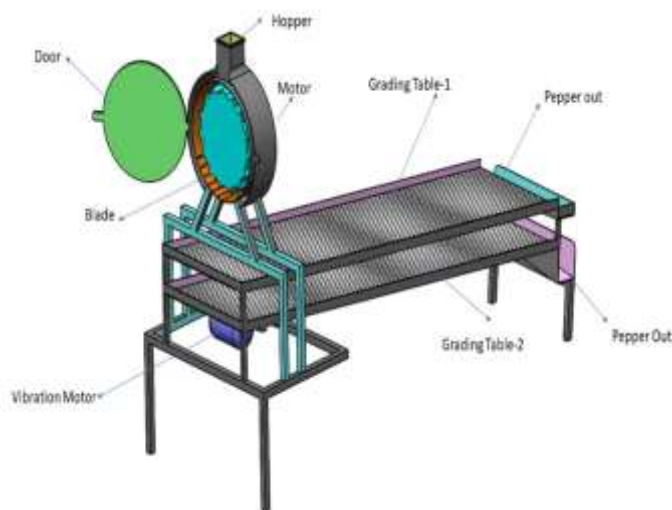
Pepper Thresher, Grading and Drying Machine CAD Model
